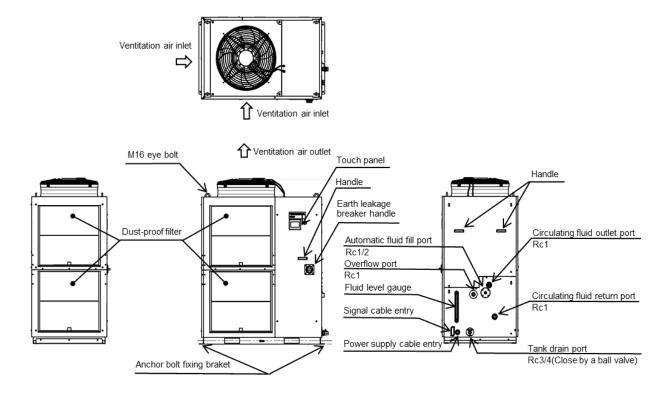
Names of the parts (This drawing shows "HRS400-A-46".)
